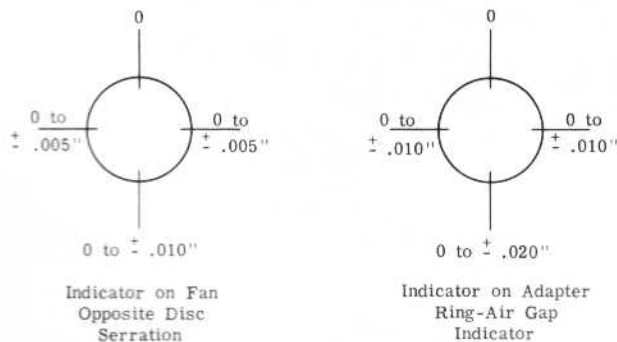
Dial Indicator Alignment Tolerances Model D12G and D12H
